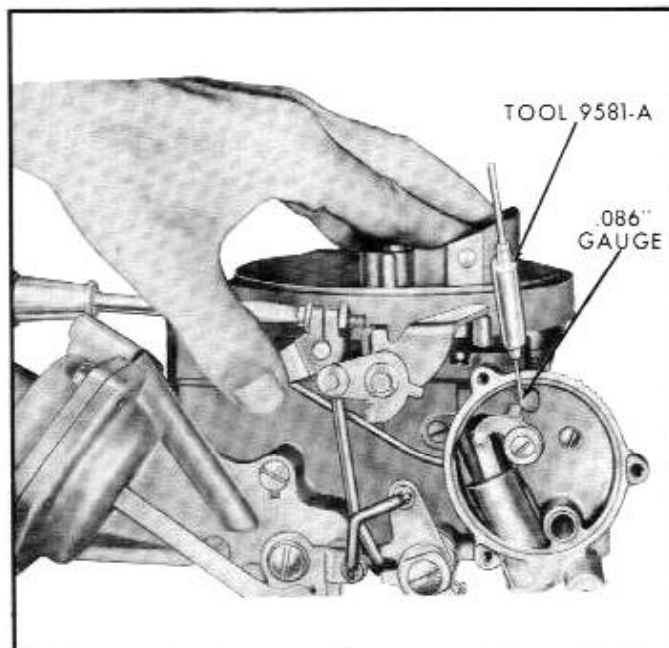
E-14—Choke Countershaft Linkage Adjustment
